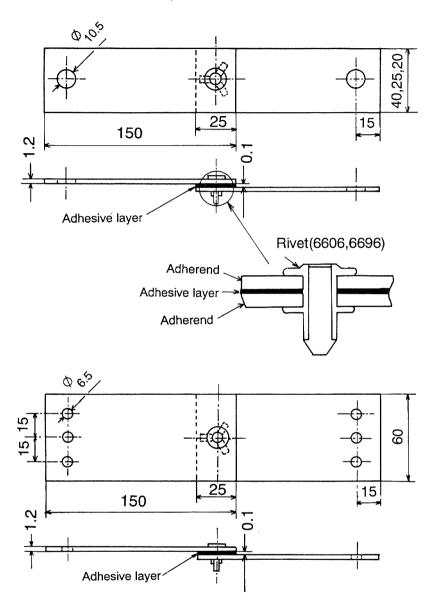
Shape and sizes of the adhesive/rivet combined joints.
